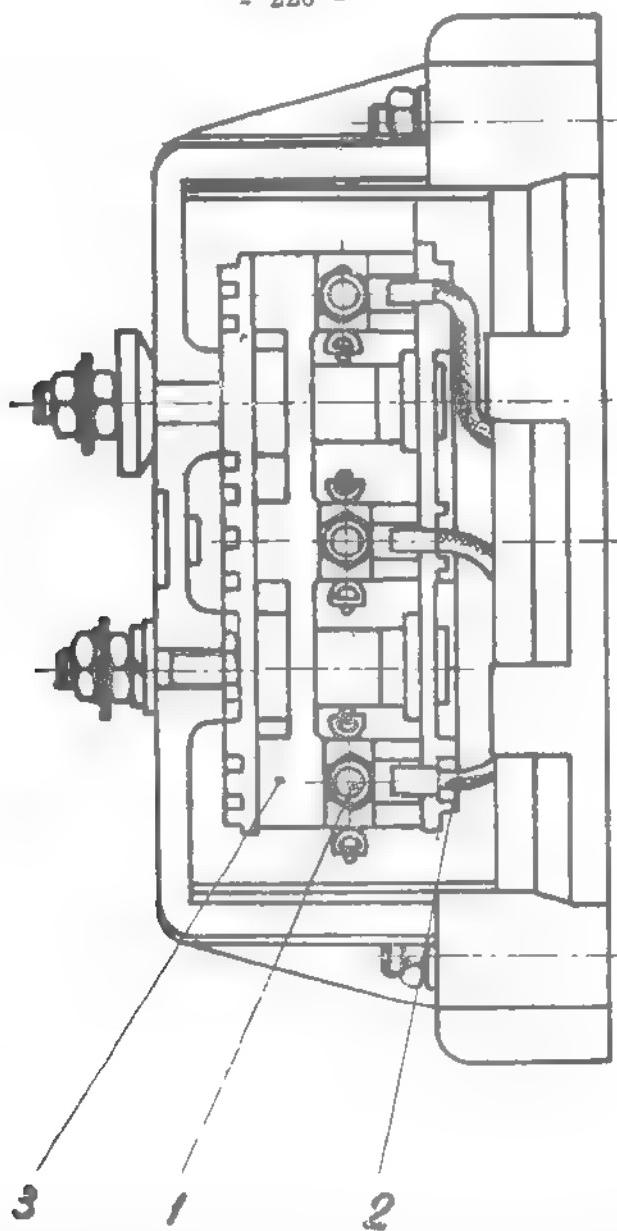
DIODE-HOLDER AND TERMINAL ASSEMBLY.
